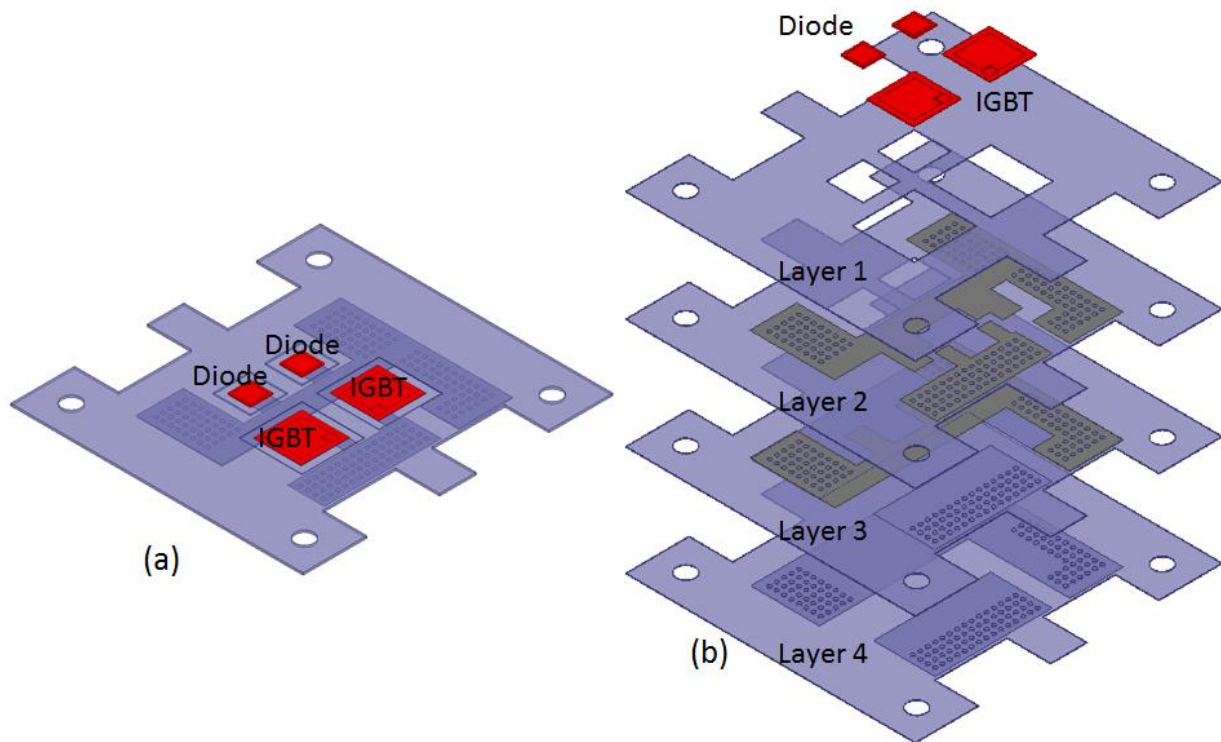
(a) LTCC die carrier interposer with device placement shown (b) exploded view of the multilayer LTCC interposer
